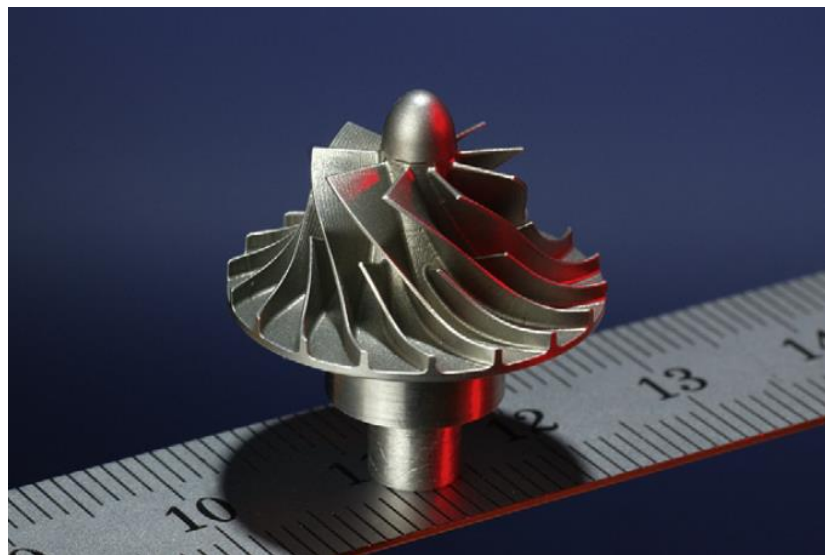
Impeller of a 1.8 kW centrifugal compressor [25]
